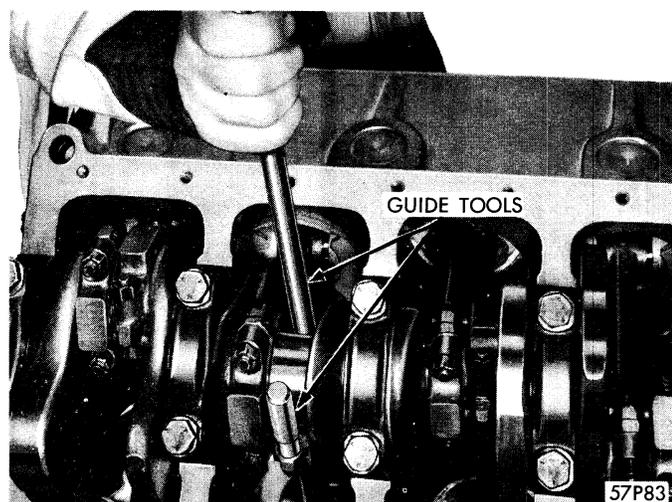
Guiding Connecting Rod on Crankshaft Journal—V-8 Engine
